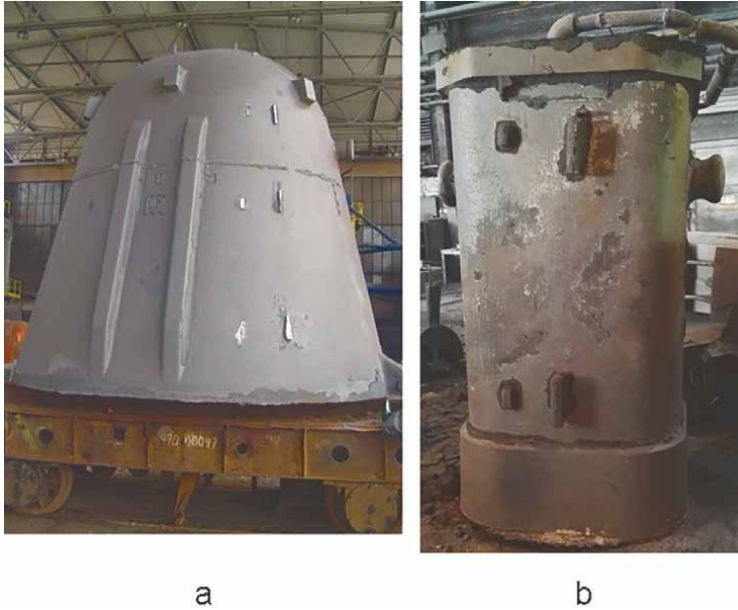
Metallurgical equipment (a/ cinder pot, b/ casting mould) made of ductile or vermicular cast iron operating under cyclic heat shock conditions.
